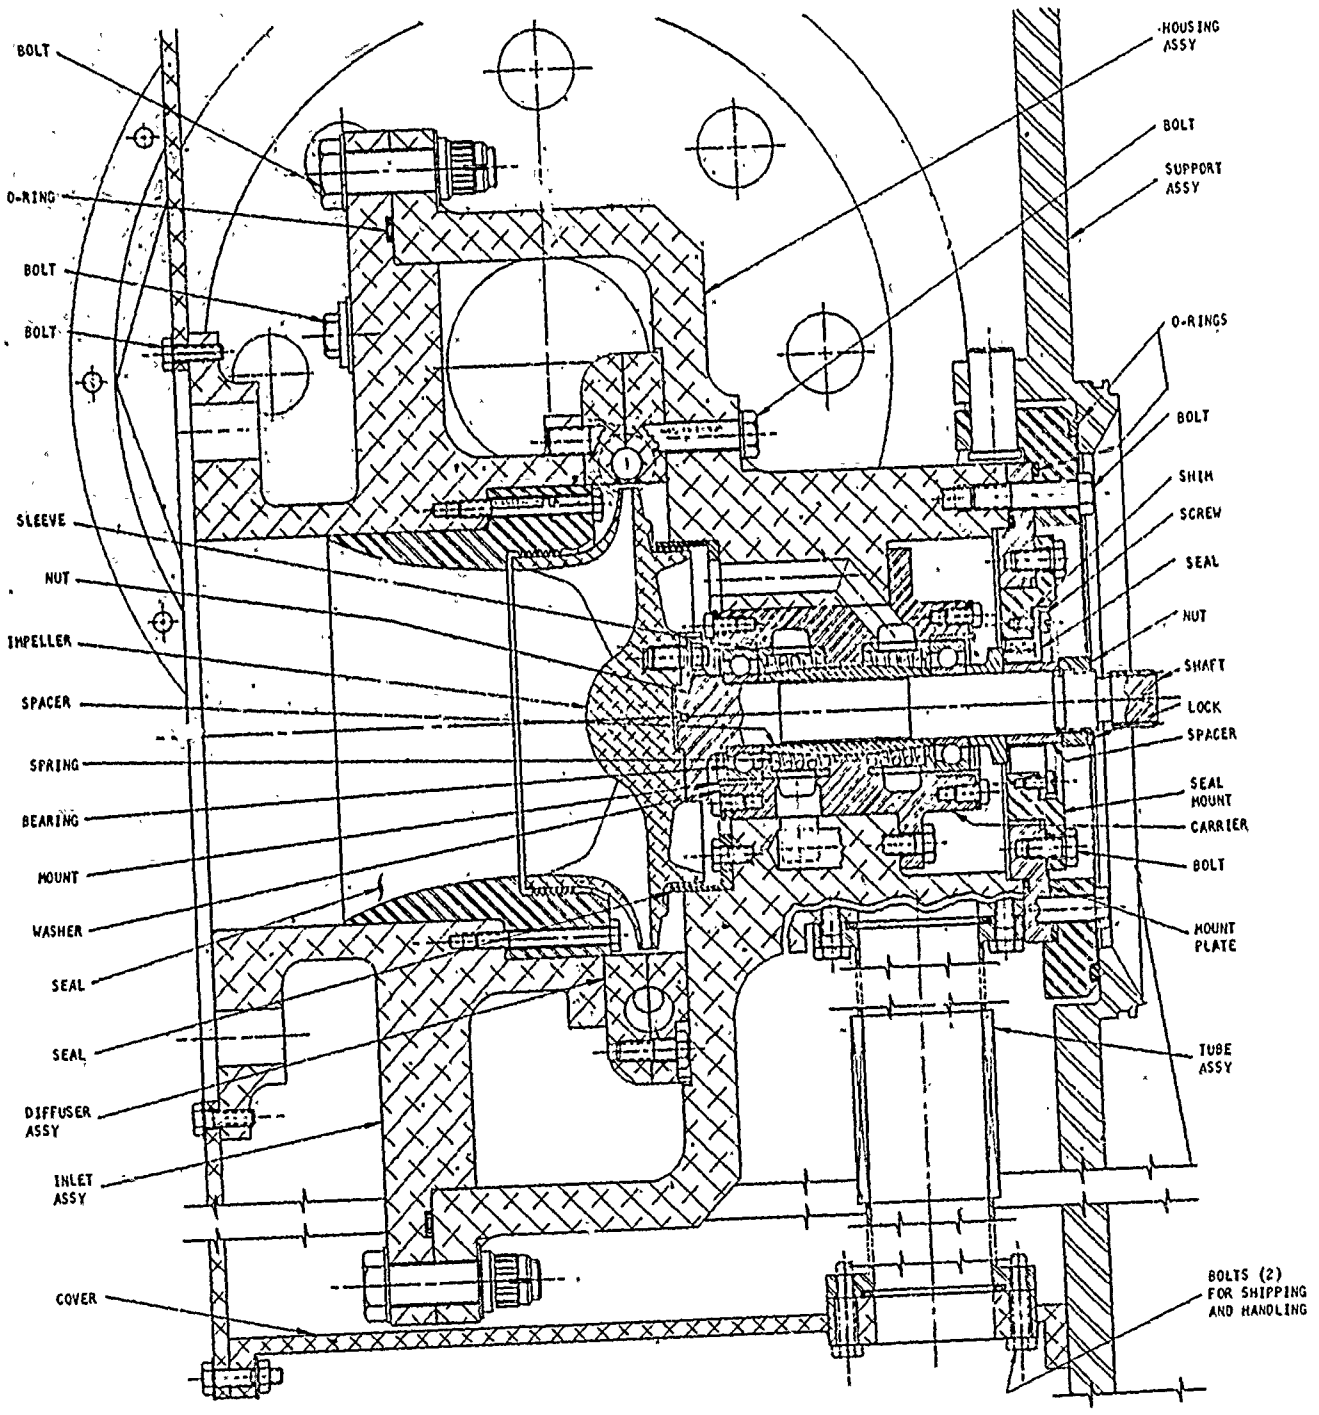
Cross-Section of Shrouded Hubless Inducer Pump
